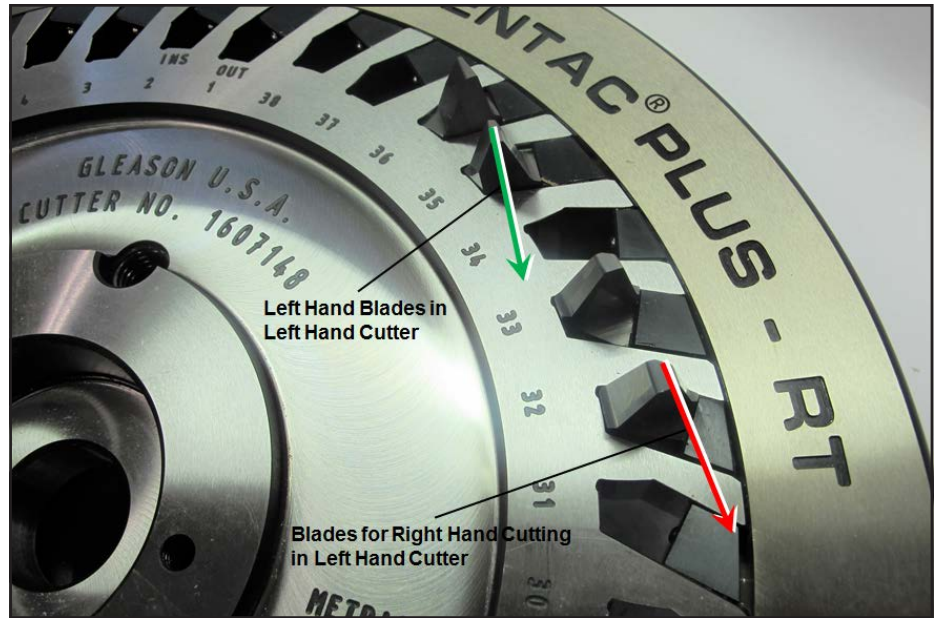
Standard blades for LH cutter and special blades for RH gear.
